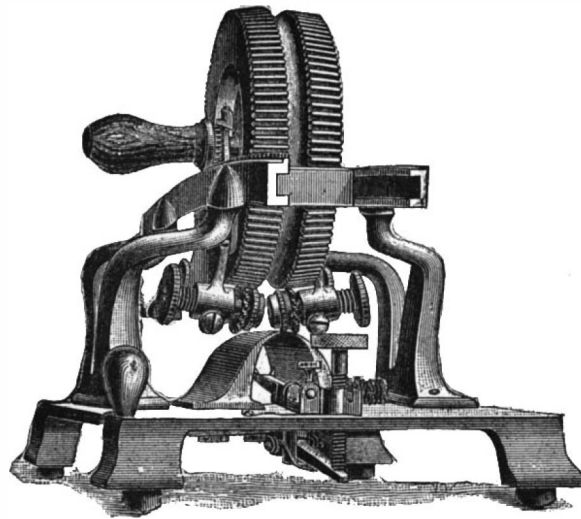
MACHINE FOR GRINDING RAZORS—END VIEW.
